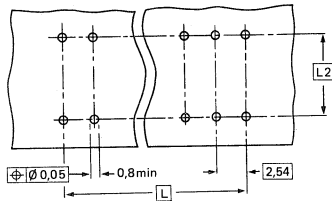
Hole pattern; see Table 1 for dimensions L and L2.
